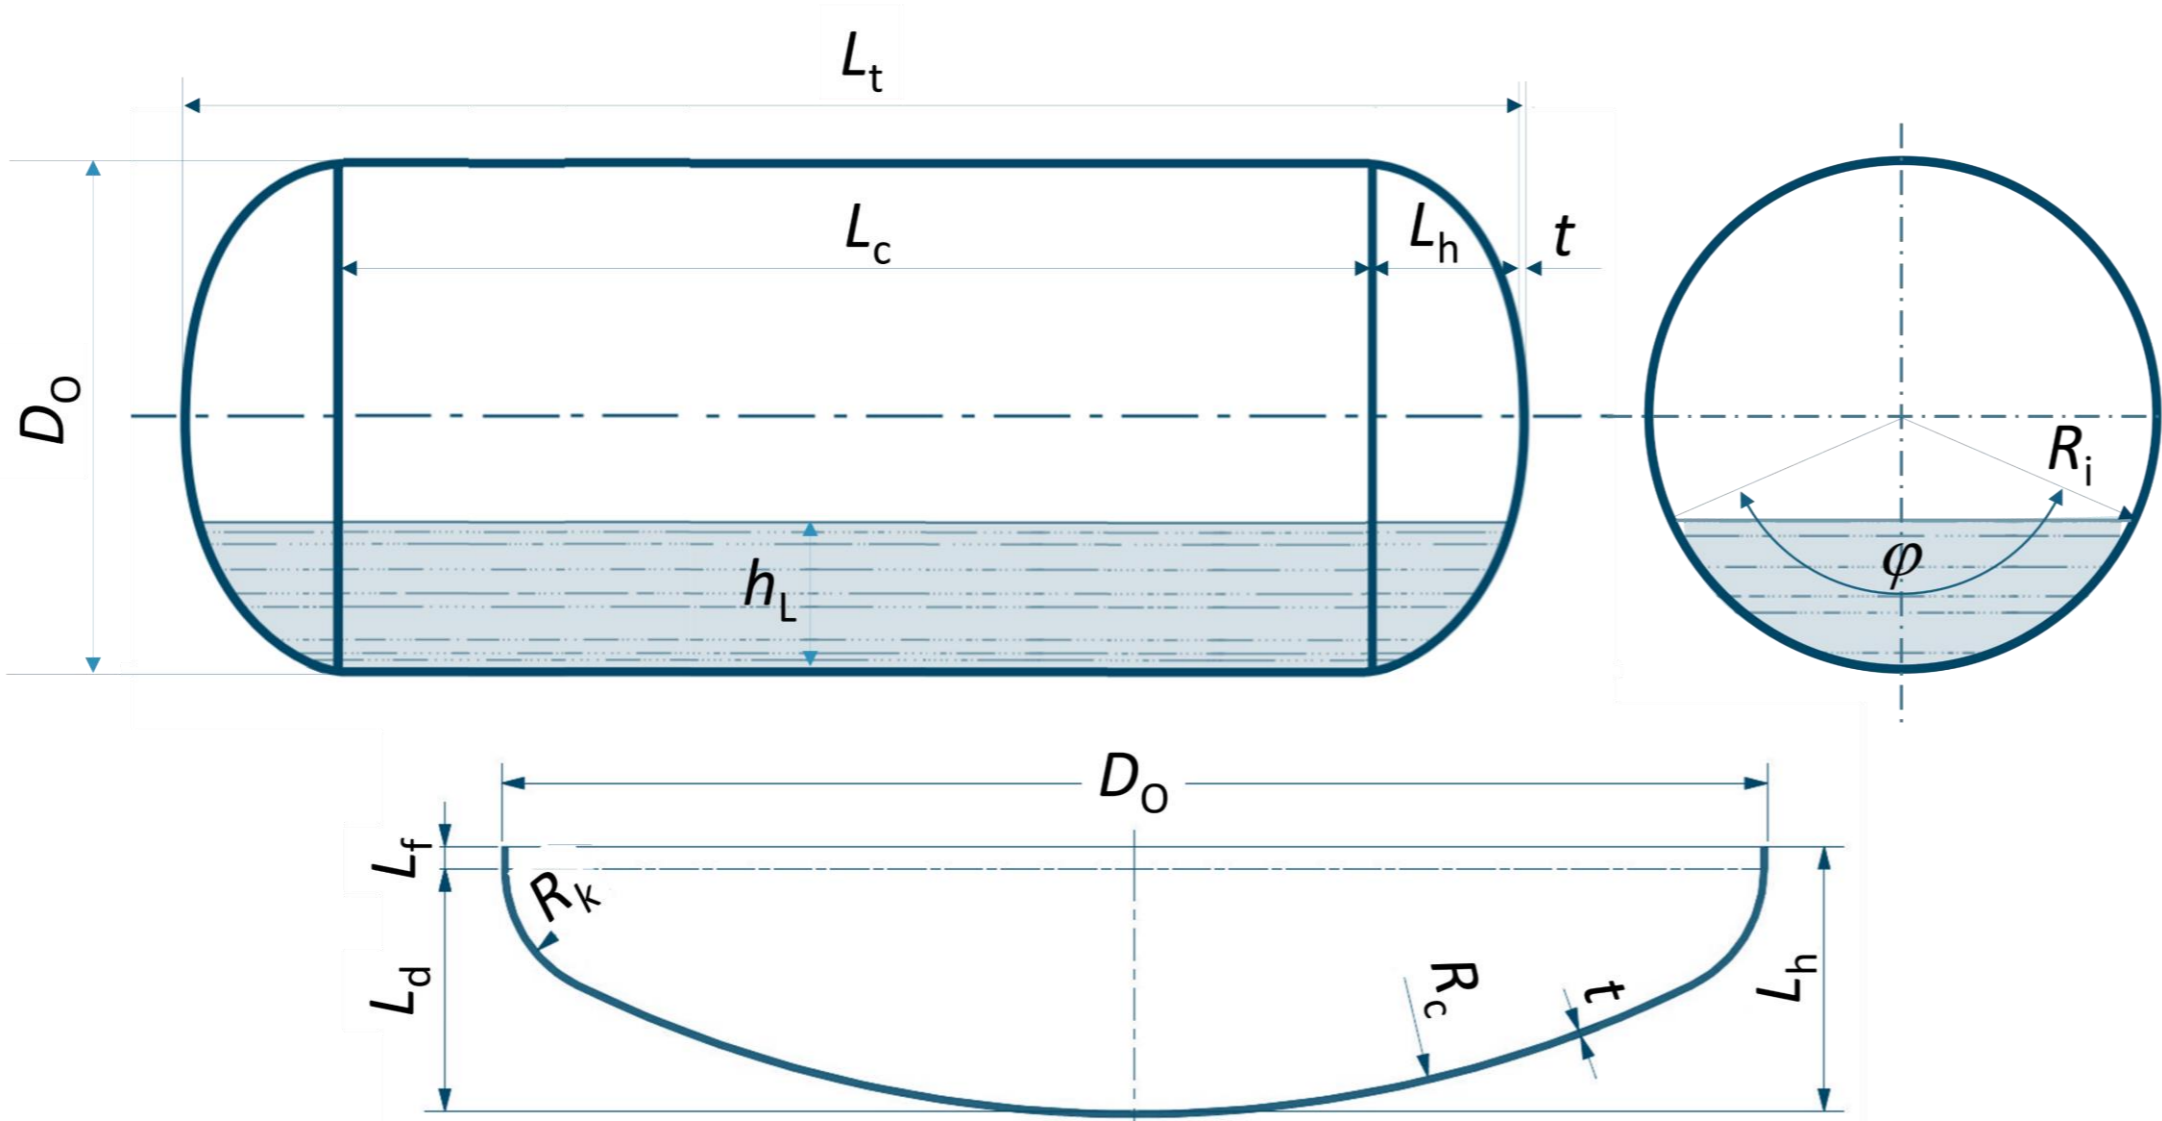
Main dimensions of the LPG tank (above) and of the torispherical side head (below)
